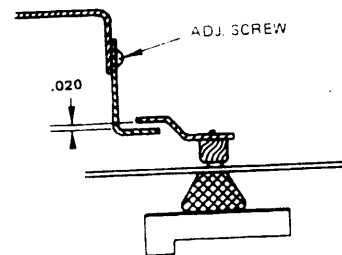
HEAD LOAD BAIL TO HEAD LOAD ARM ADJUSTMENT (OLD STYLE)
